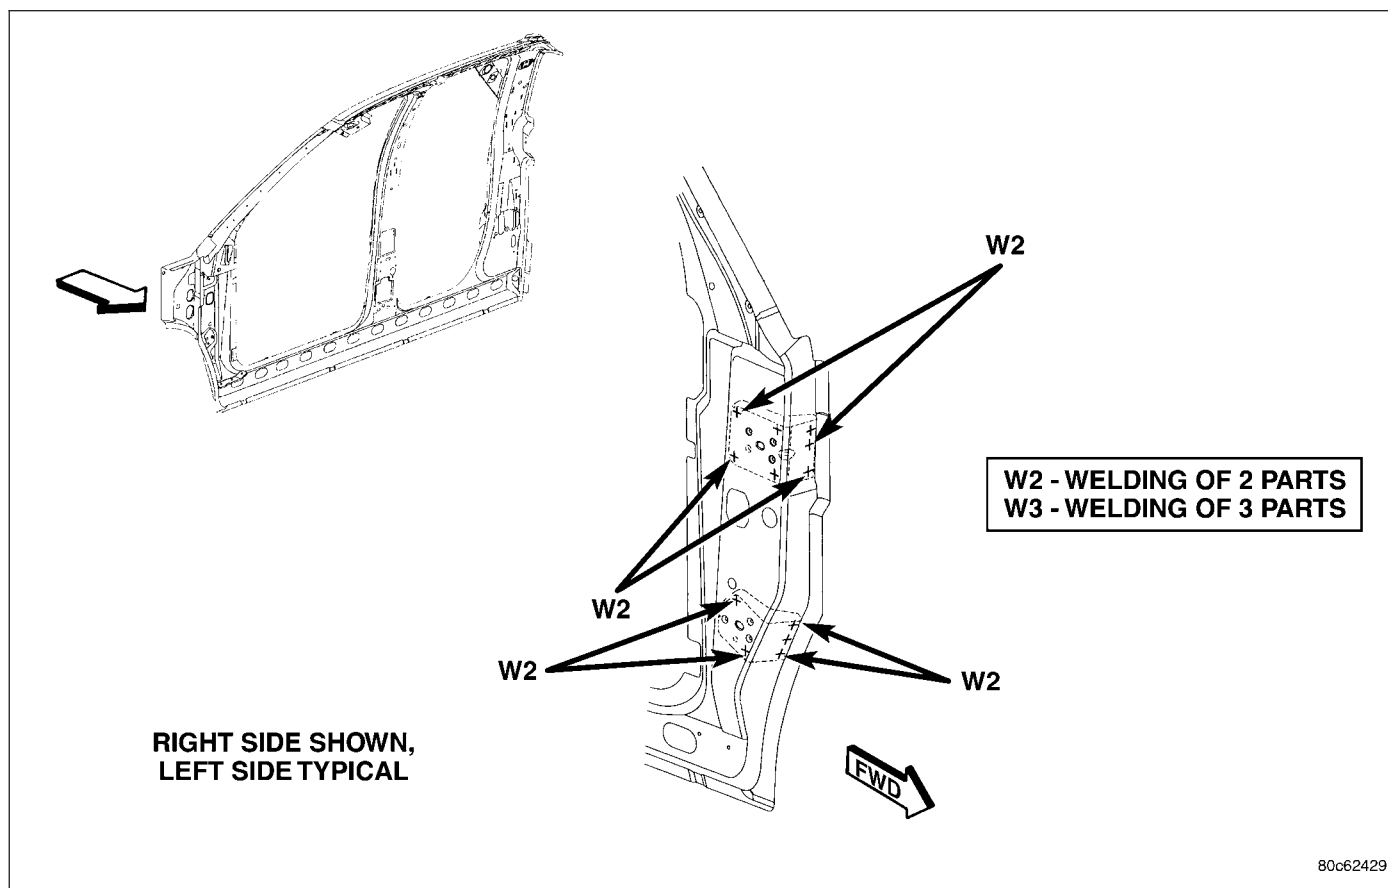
UPPER A-PILLAR TAPPING PLATE - QUAD CAB
